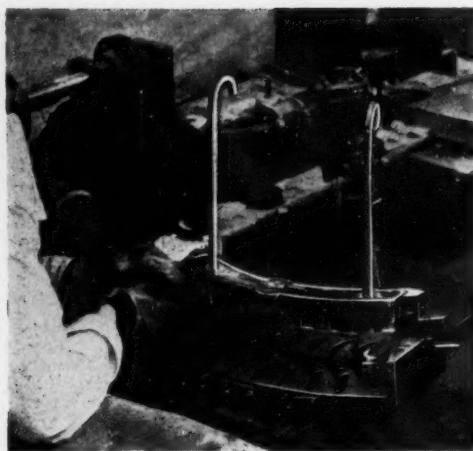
The mercury pattern for the component seen in Fig. 4 is here shown just prior to removal
